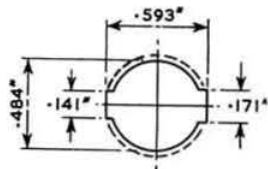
Chassis cut-out for the Cinch Nuvistor socket, type 133-65-10-001.
